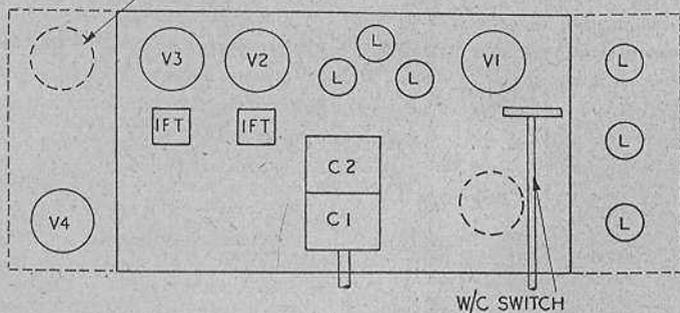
Sketch showing layout of chassis and main components. The dotted lines indicate the added chassis at either end.
